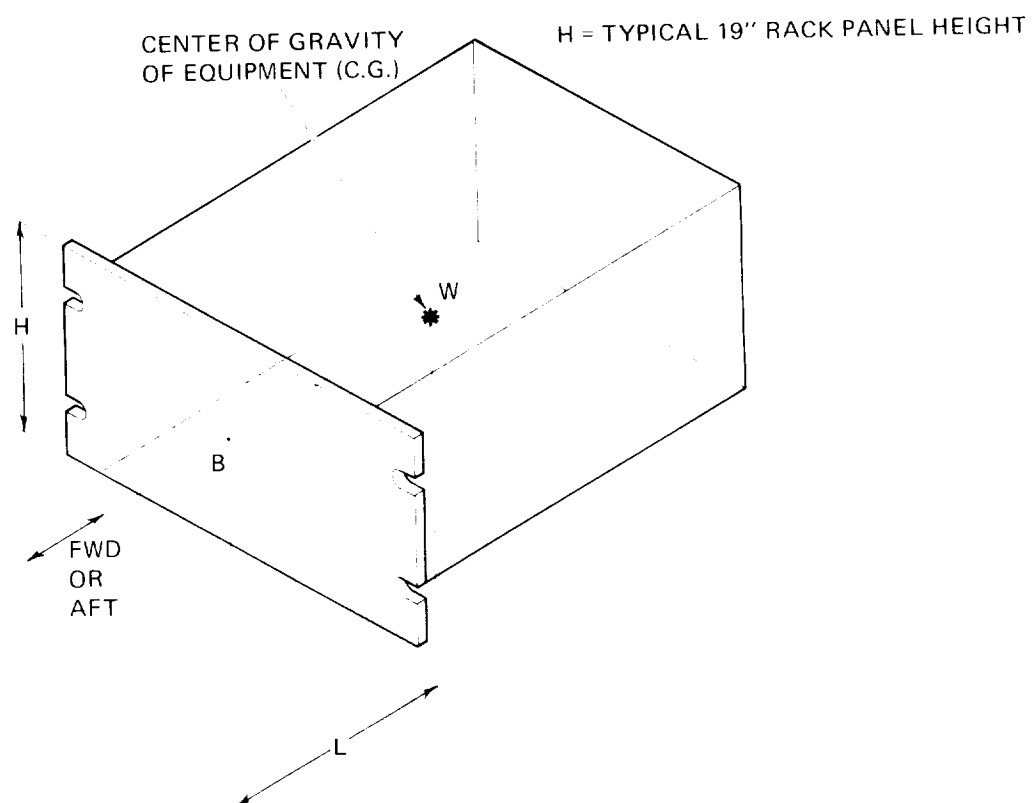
Rack-Mounted Equipment Center of Gravity
